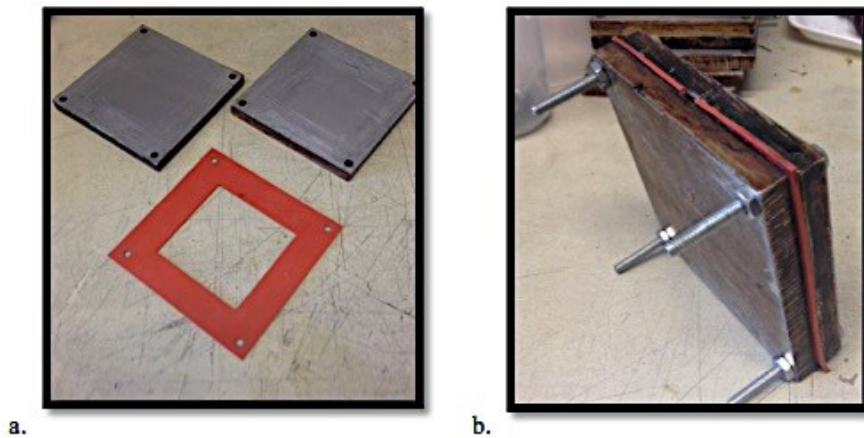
a) Stainless steel molds and sealing rubber, and b) the configuration of the closed mold.
